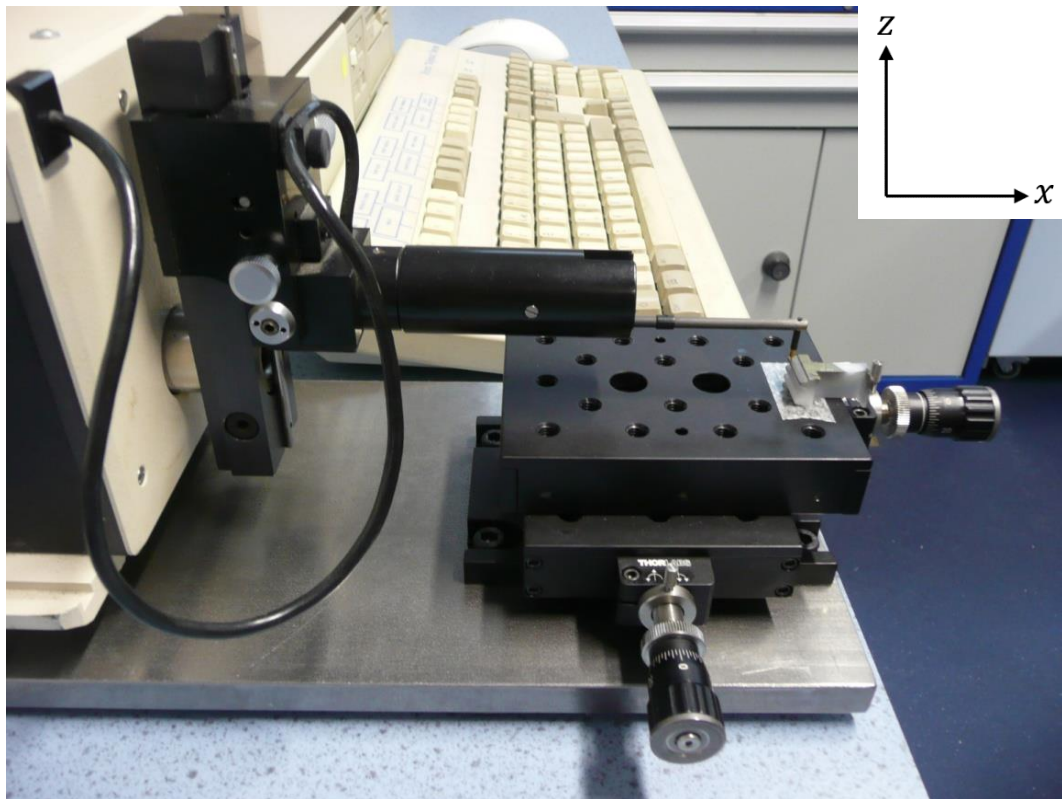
Talysurf form measurement and positioning of the sample gear tooth.
